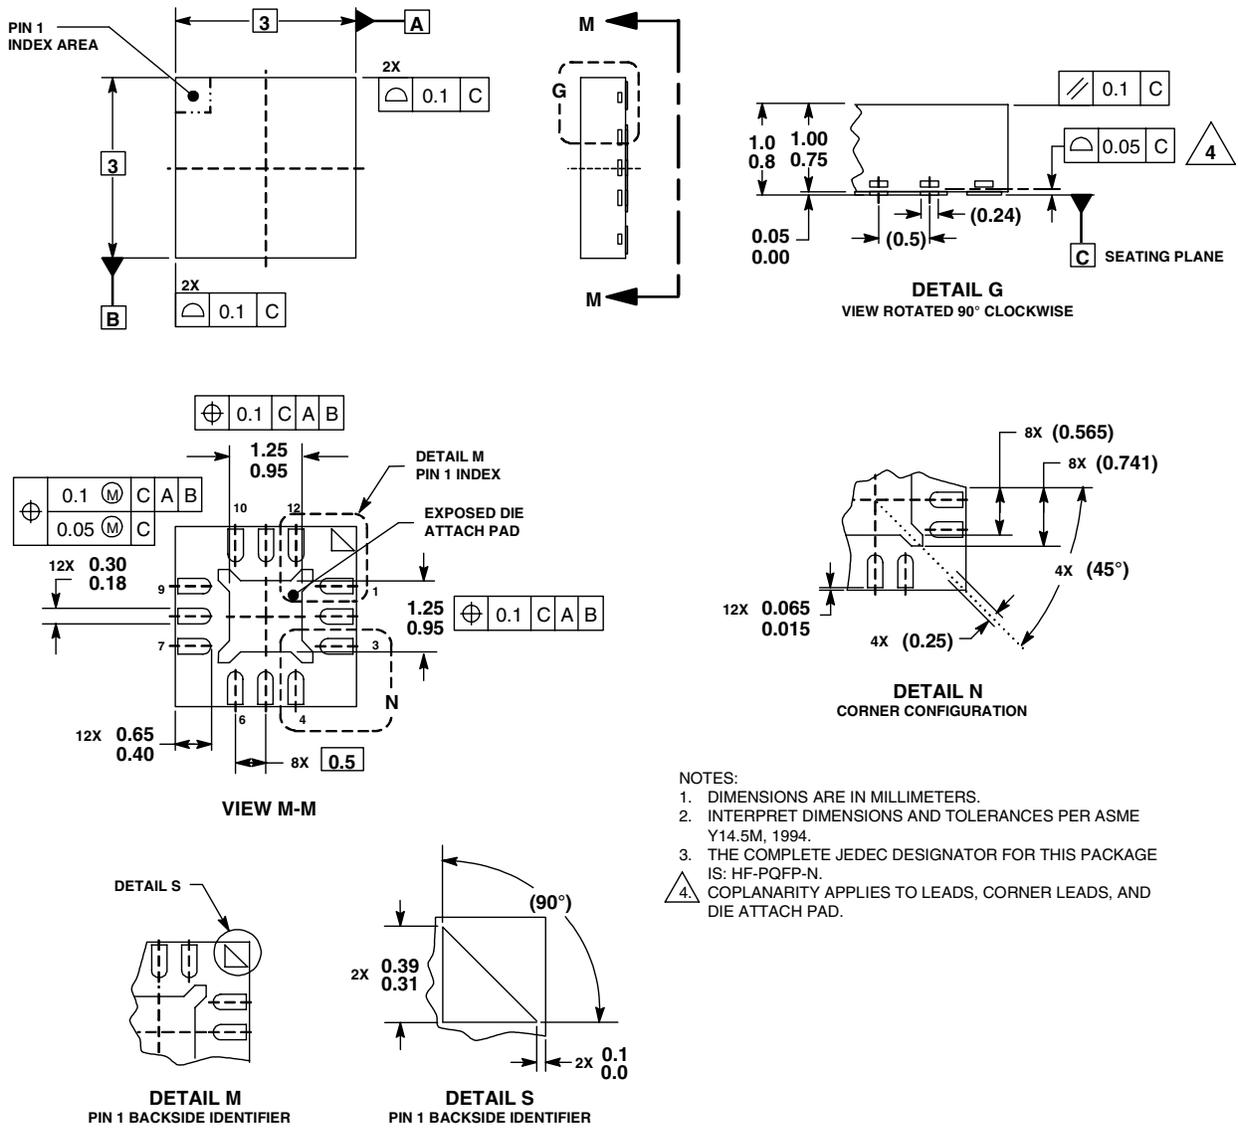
Outline Dimensions for QFN-12, 3x3 mm (Case 1408-01, Issue O)
